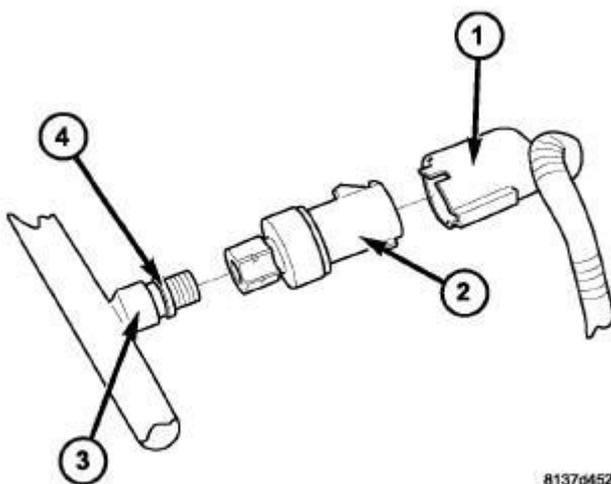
A/C Pressure Transducer, Connector, Discharge Line & O-Ring
